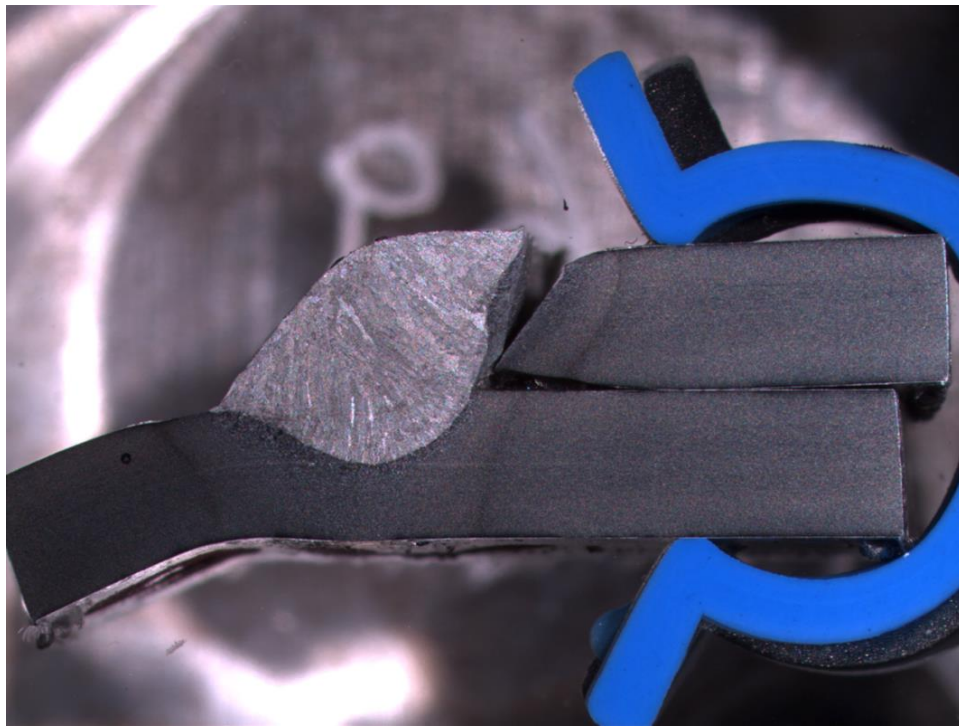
Example of fracture that occurred in HAZ adjacent to weld (Sample M6 - typical of all failures that were not a result of internal porosity).
